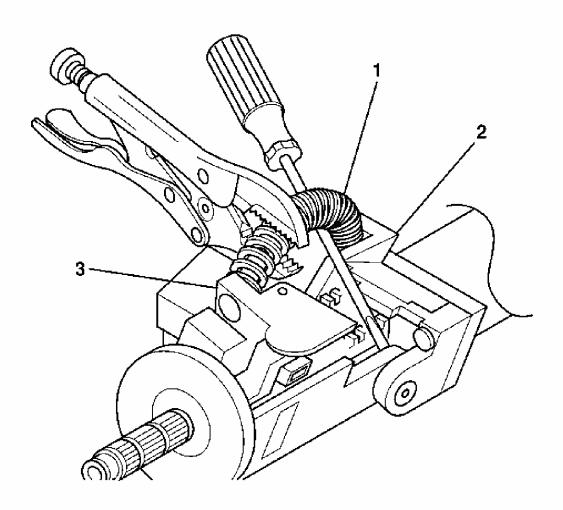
Removing Tilt Spring From Steering Column Support Assembly Courtesy of GENERAL MOTORS CORP.
